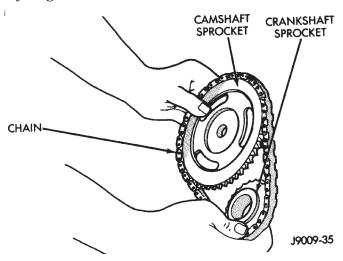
Camshaft and Crankshaft Sprocket and Chain
